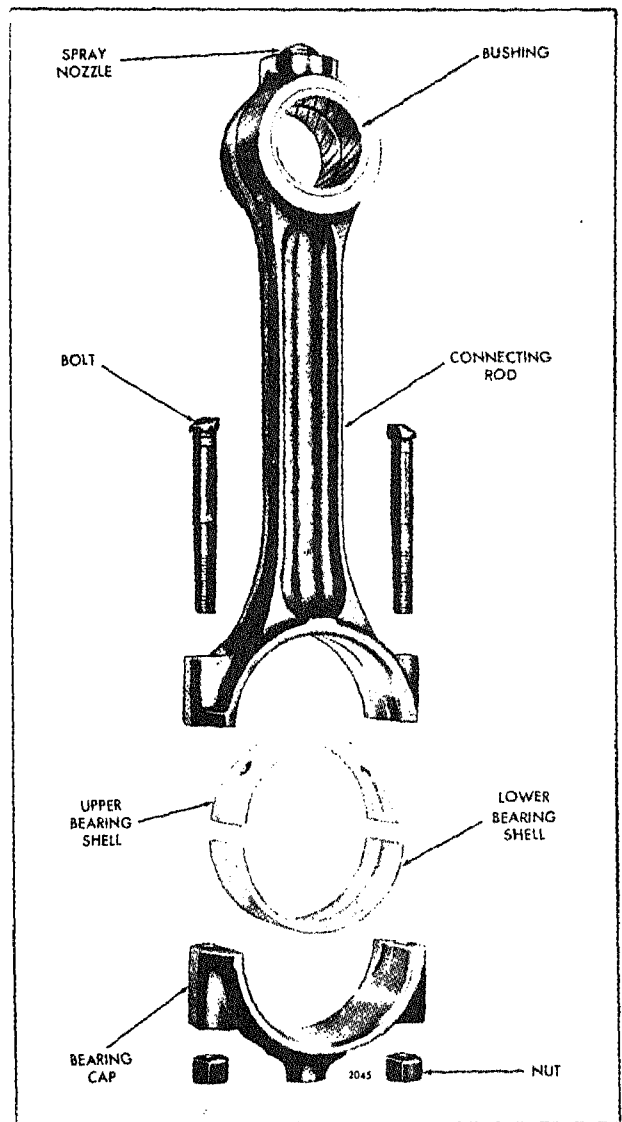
Connecting Rod Details and Relative Location of Parts
